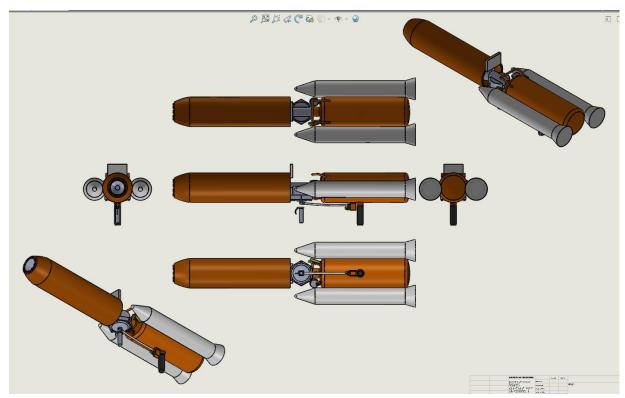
B: Preliminary System CAD Model - Multiple Views
